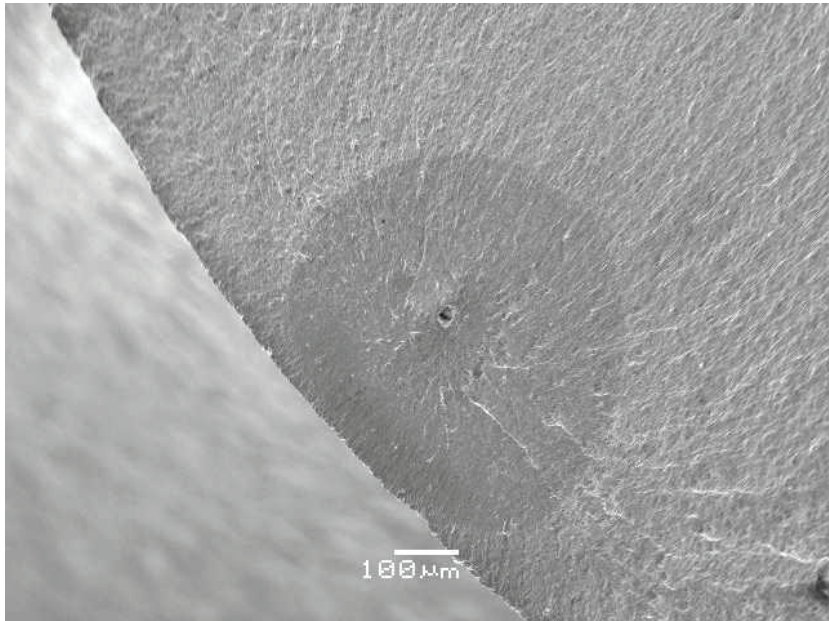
Fracture surface of a valve spring wire.
